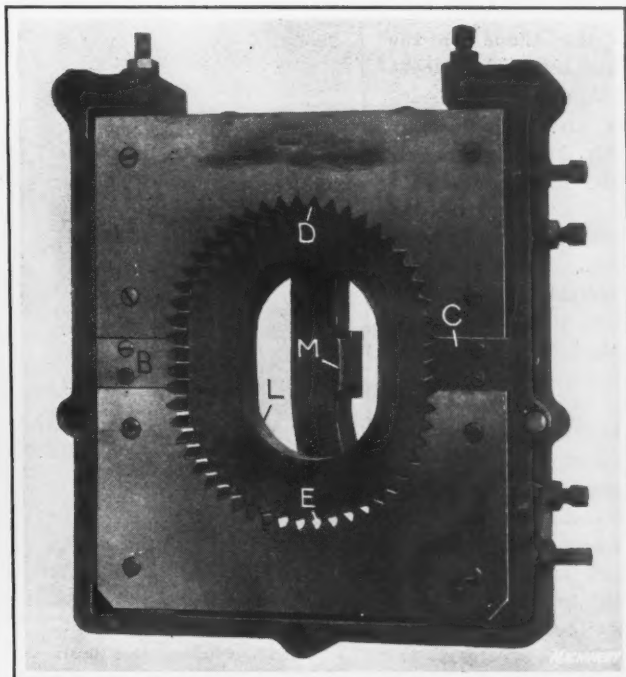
Plan View of Toothed Track about which Master Gear, shown in Fig. 15, rolls
